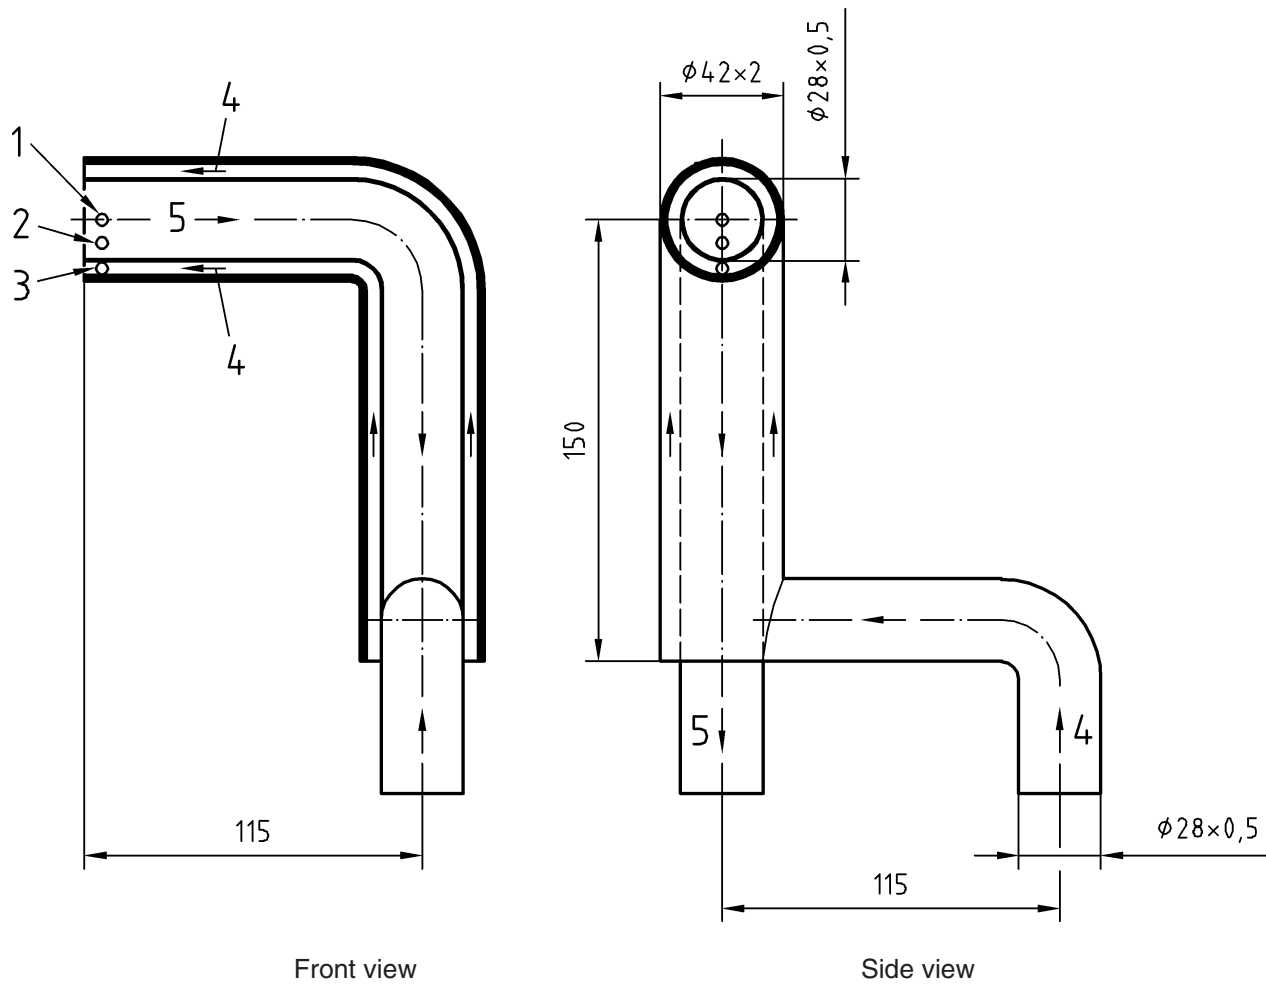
Scheme of test equipment for testing carbon monoxide performance using dummy head
